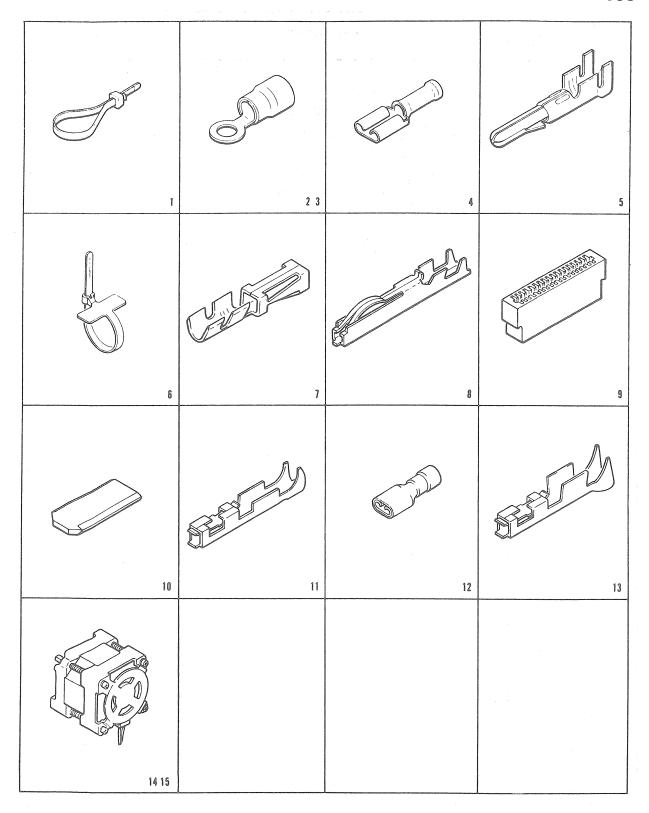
HARNESS AND CABLE COMPONENT ASM
